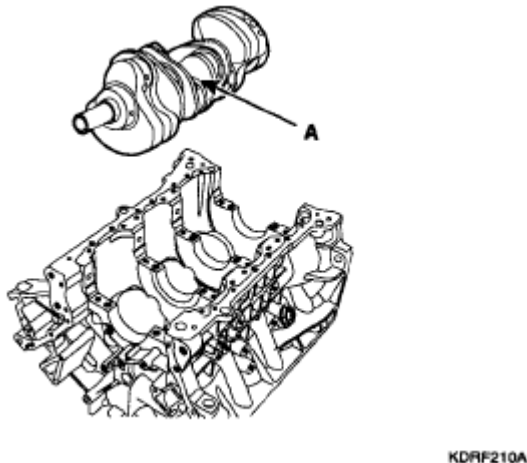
Lifting Crankshaft (A) Out Of Engine
